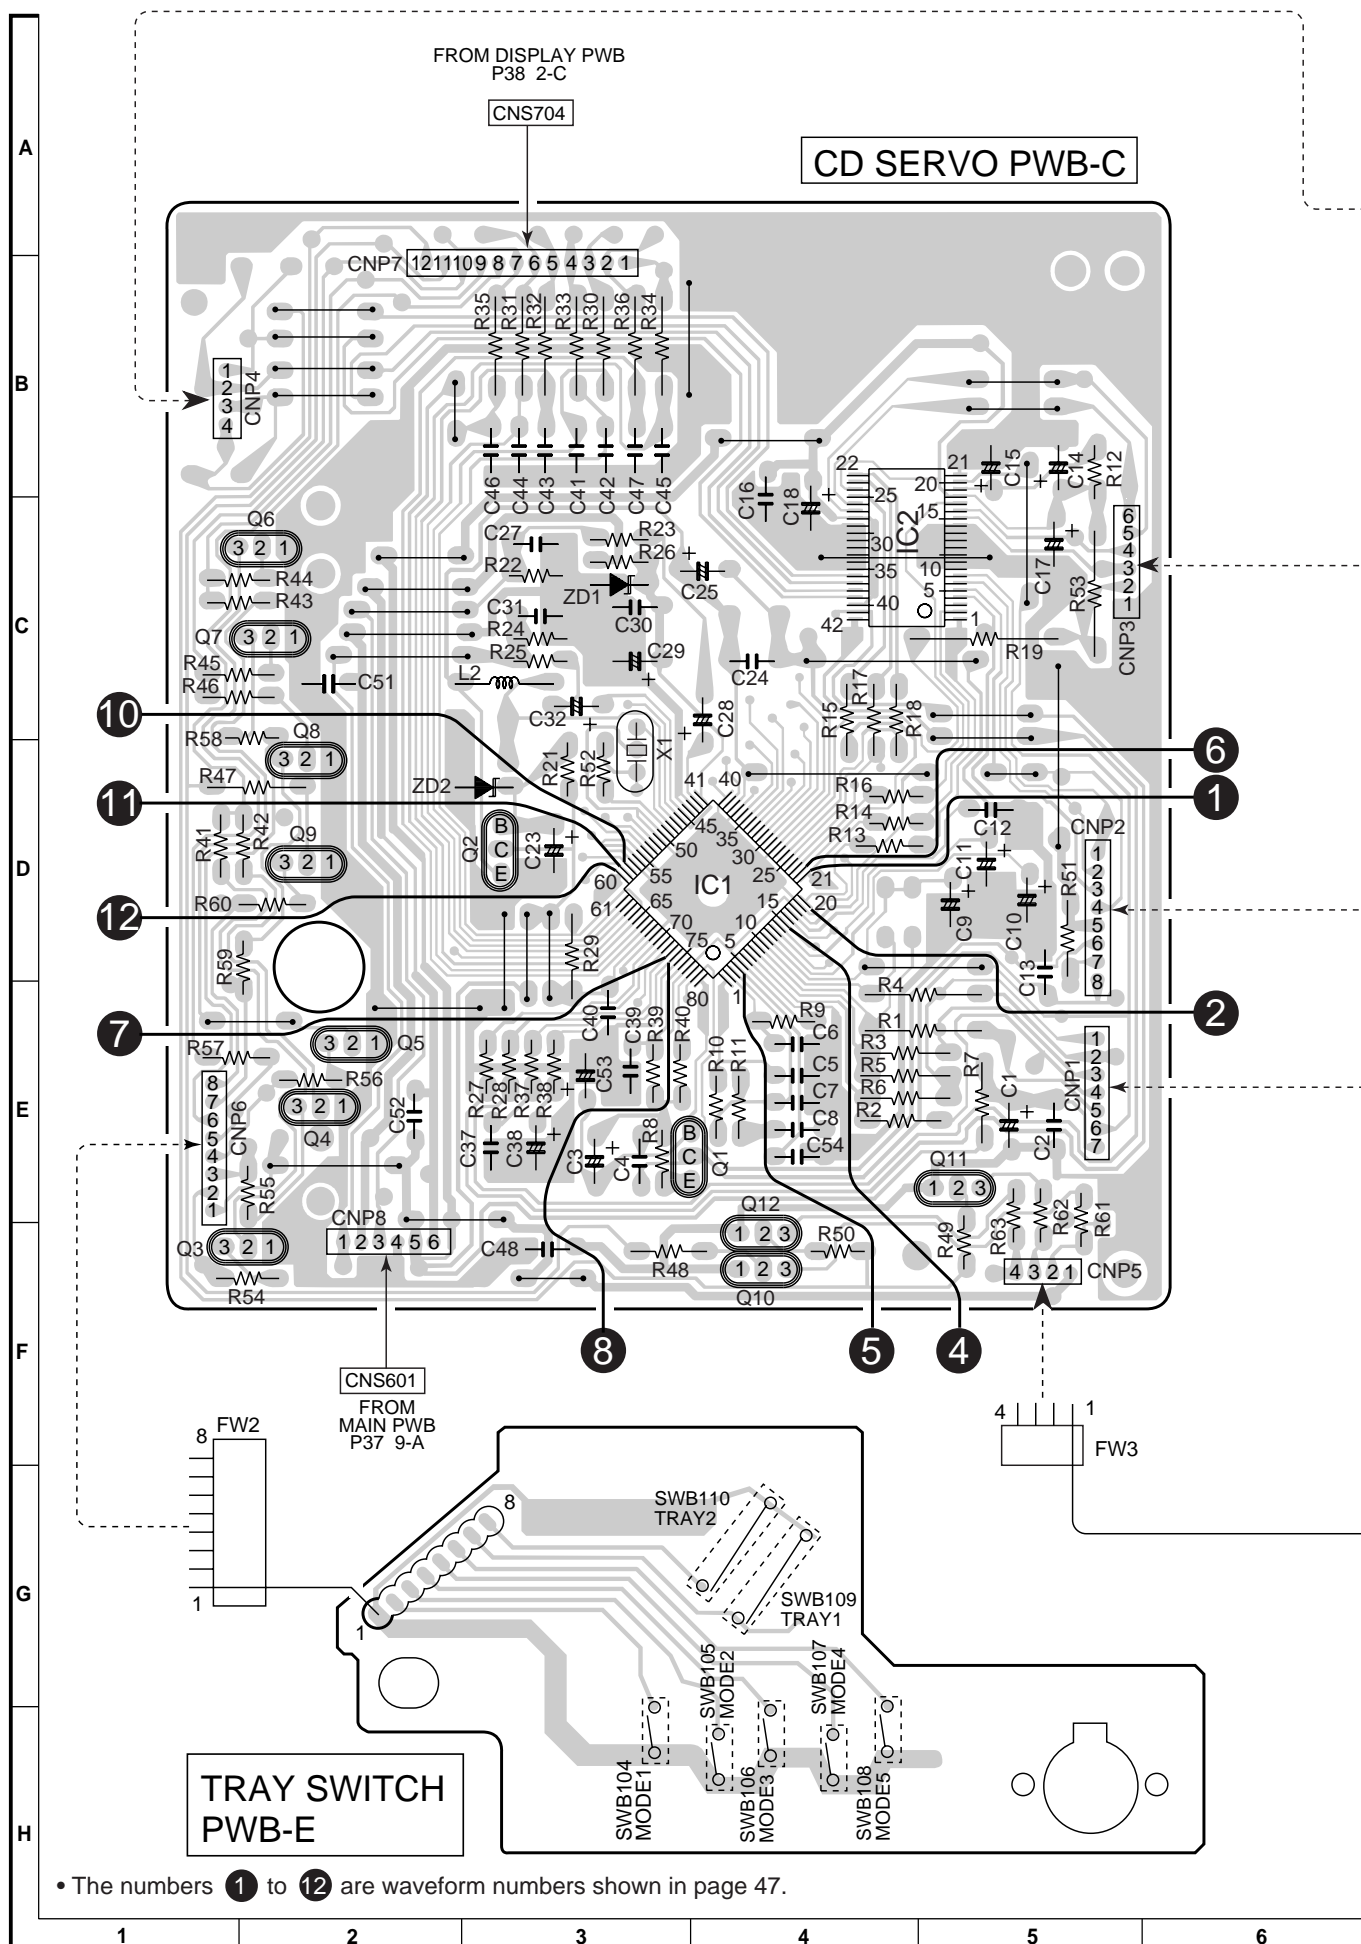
WIRING SIDE OF P.W.BOARD (7/9)
